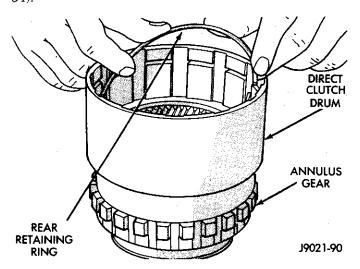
Installing Clutch Drum And Rear Snap Ring
